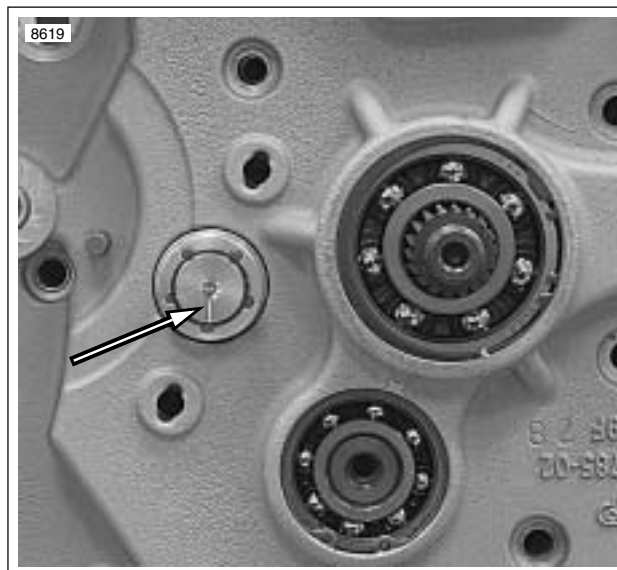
Scribed Line on Shifter Drum at 6 O'clock (Transmission in 4th Gear)
